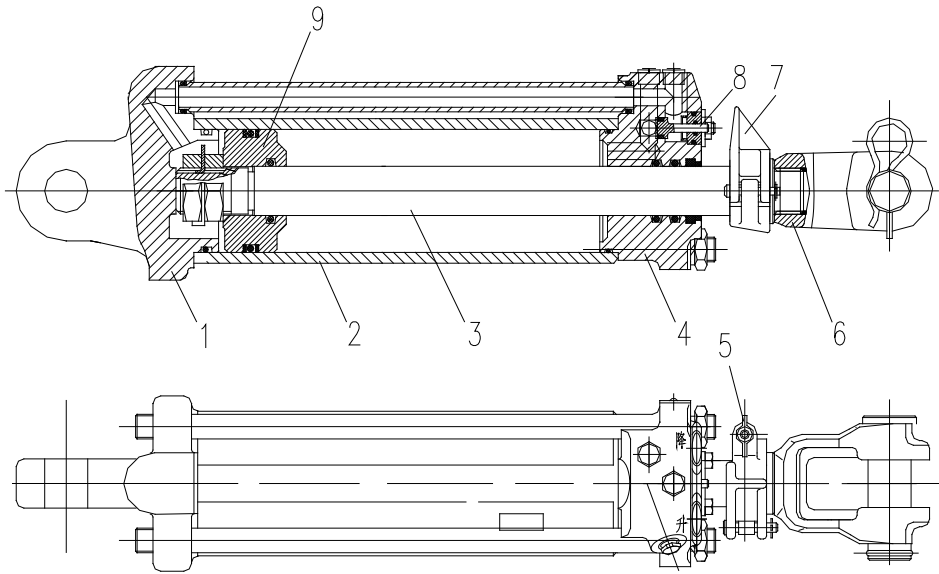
Adjusting the oil cylinder of the split type lifter
